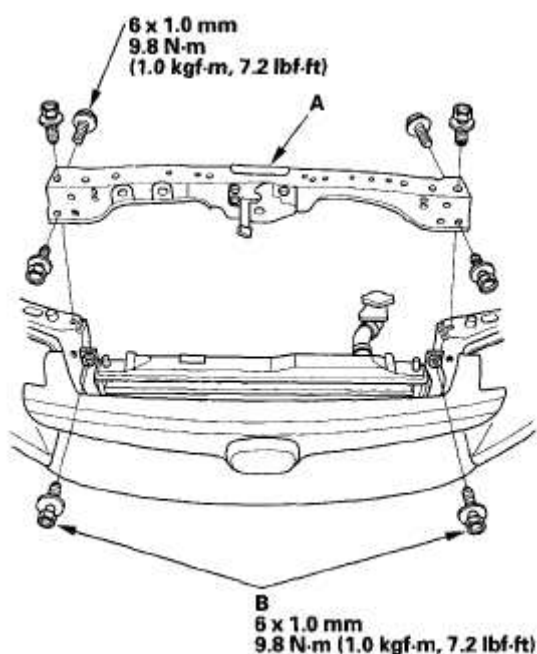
Installing Condenser Bracket Mounting Bolts (With
